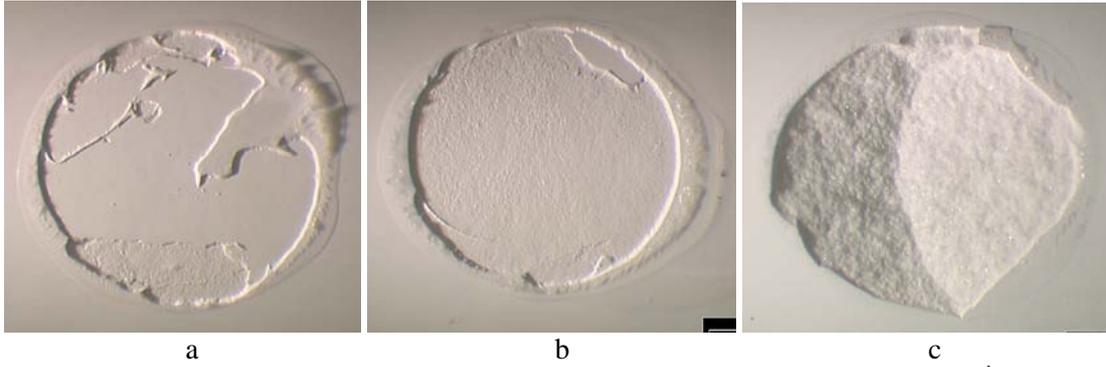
Fractography of the fractures surfaces: a, 1100°C - interface 1st and 2nd layer, b = 1200°C – interface support tube and 1st layer, c = 1300°C – bulk material support tube
